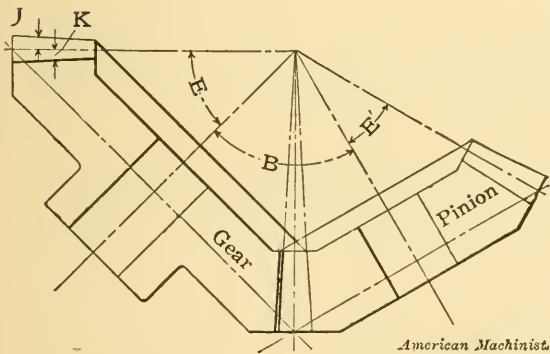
BEVEL GEARS WITH AXES LESS THAN 90 DEGREES.
